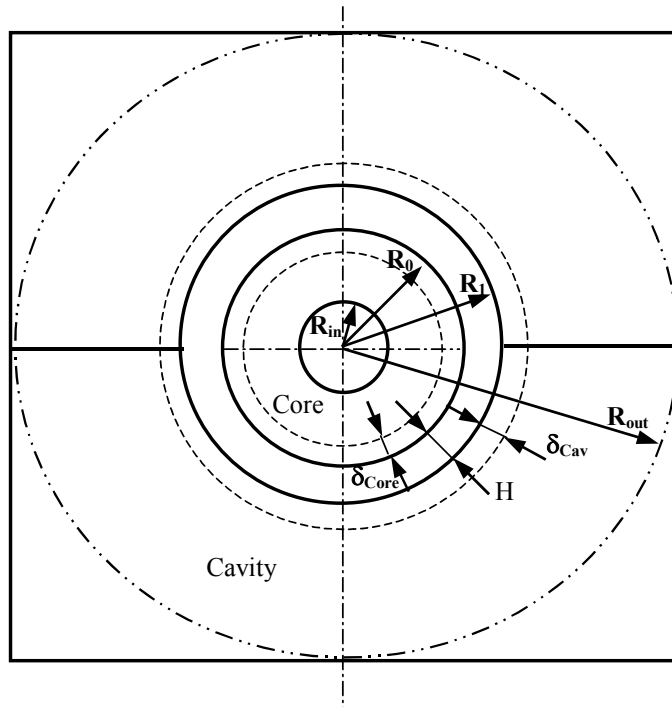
Schematic view of the cross section of the mould and the deformation caused by the moulding pressure
